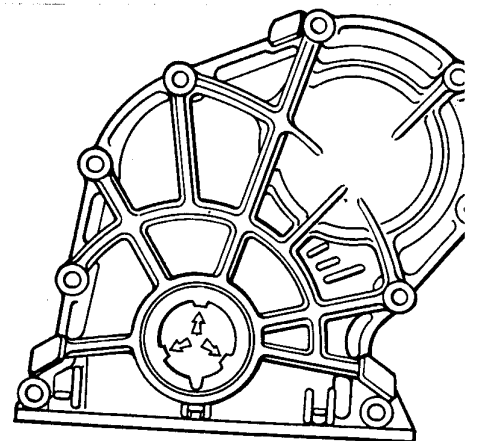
Camshaft Drive Cover. Arrows Show for Aligning Cover with Crankshaft Pulley
